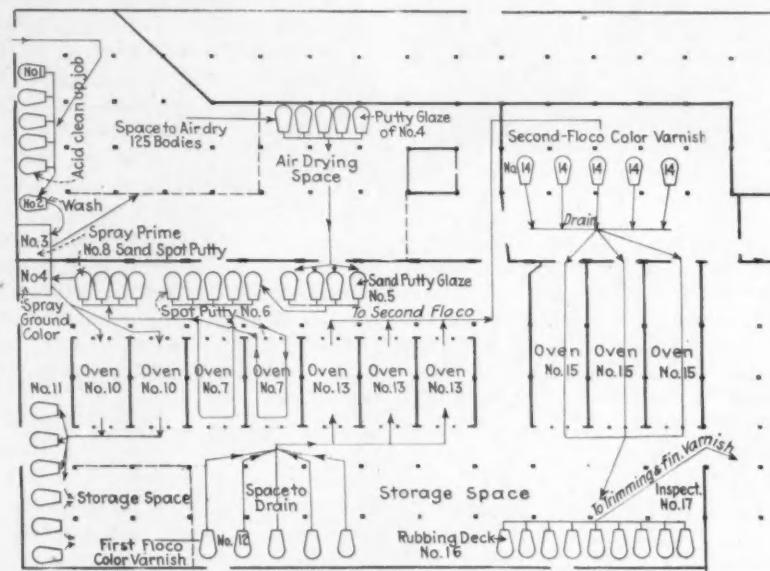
FLOOR PLAN OF BODY DEPARTMENT USING FLOWING-ON METHODS
